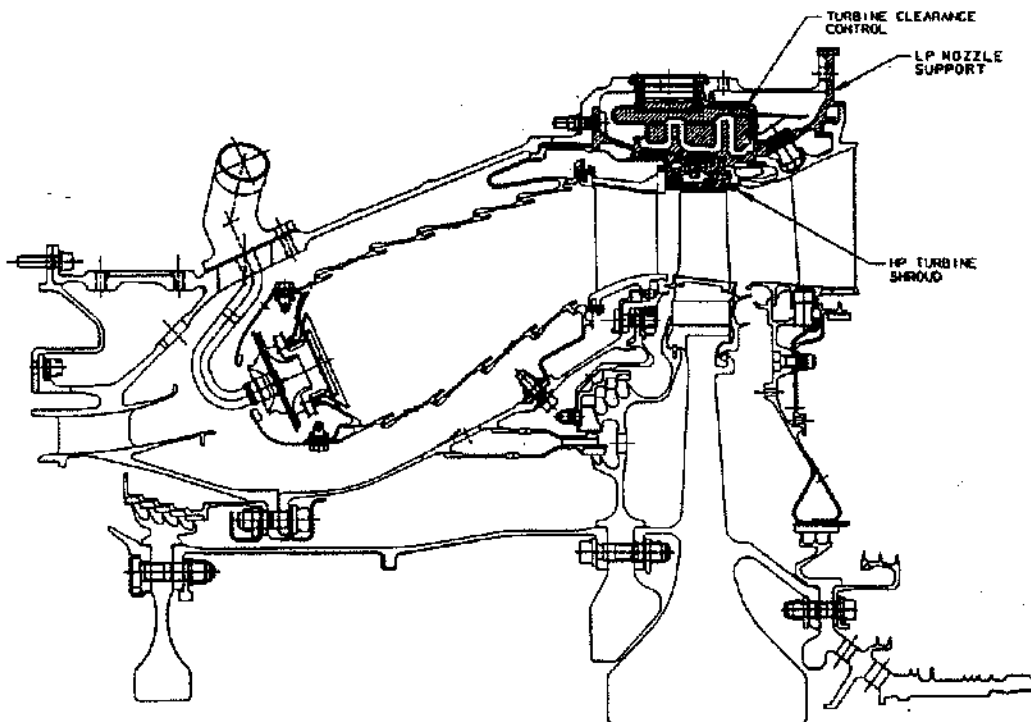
HP Turbine Shroud, LP Nozzle Support and Turbine Clearance Control
